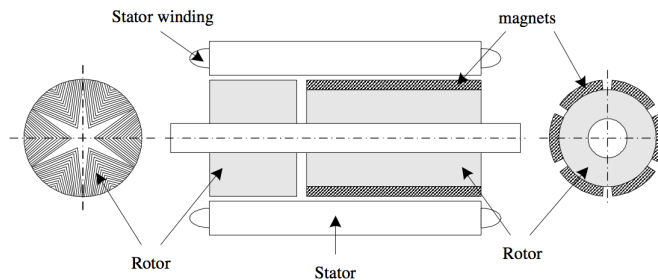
Construction of Two rotor synchronous PM machine [8]
